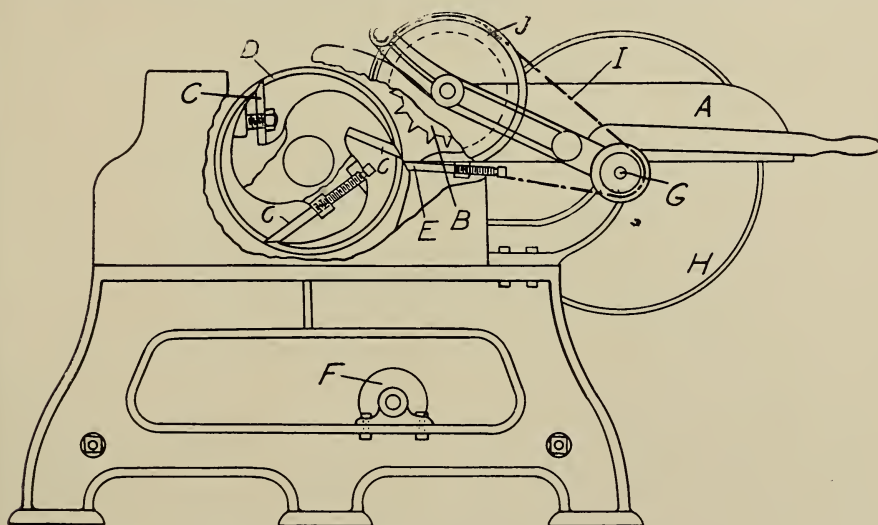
THE "GIANT" SCRAP CUTTER.
